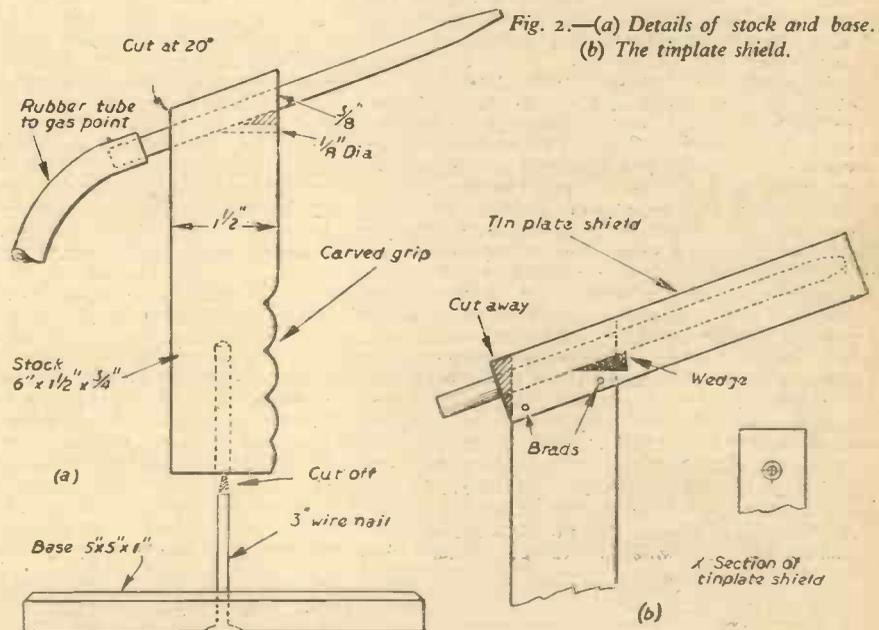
(a) Details of stock and base. (b) The tinplate shield.
